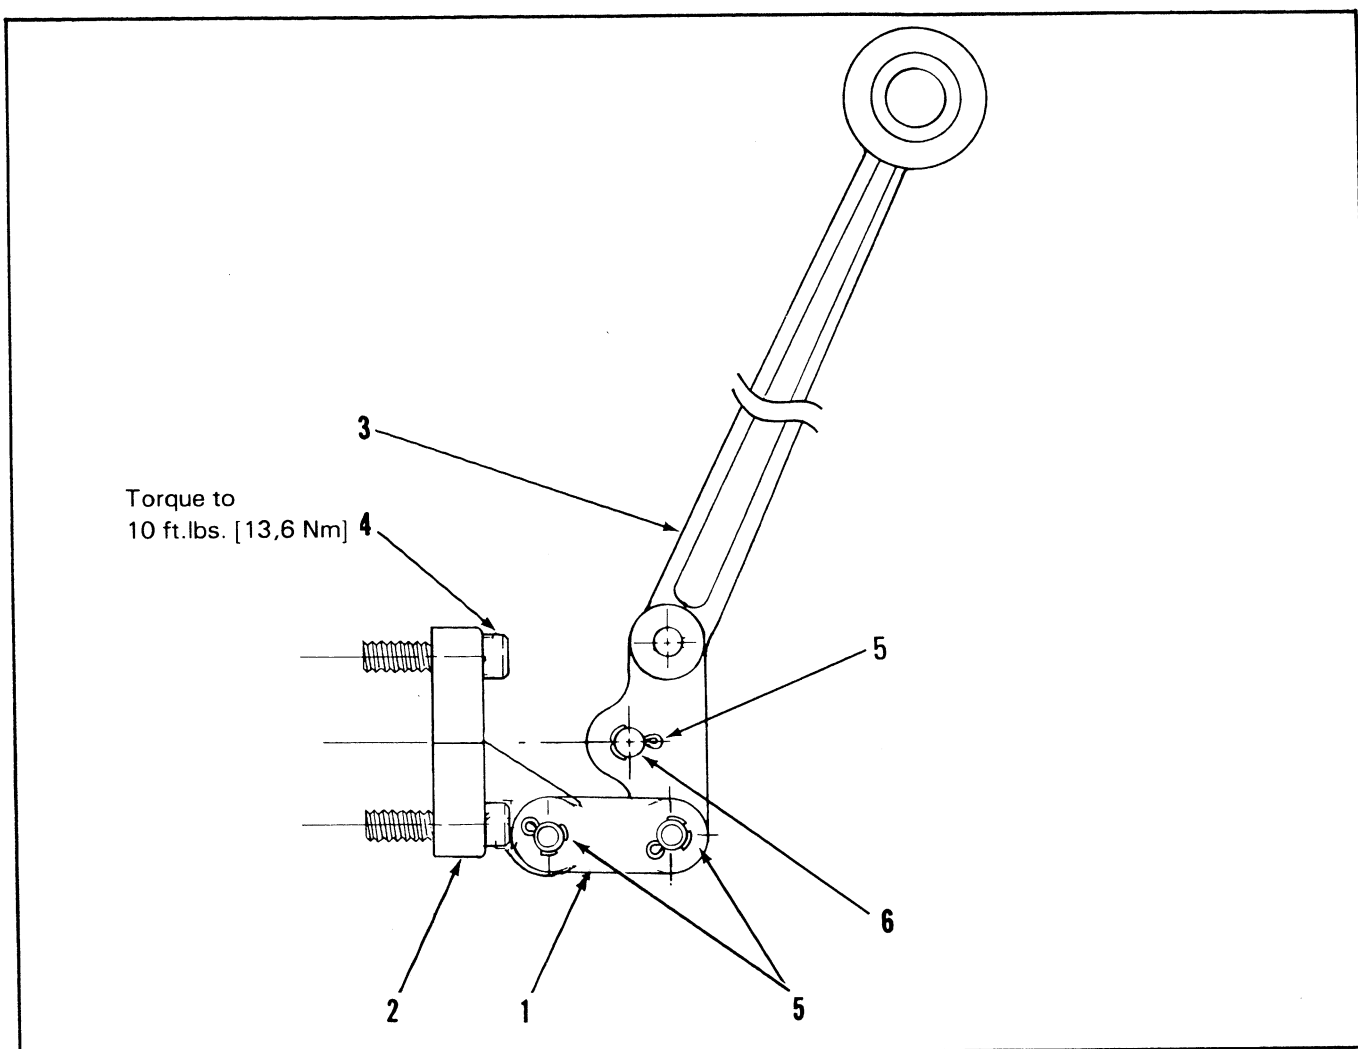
Optional Vertical Handle and Bracket Assembly.
